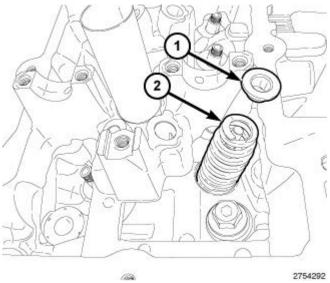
Valve Spring & Valve Spring Retainer Courtesy of CHRYSLER GROUP, LLC
